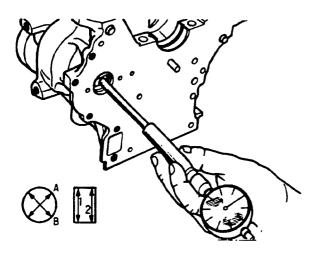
MEASURING BALANCER SHAFT BEARING I.D.
